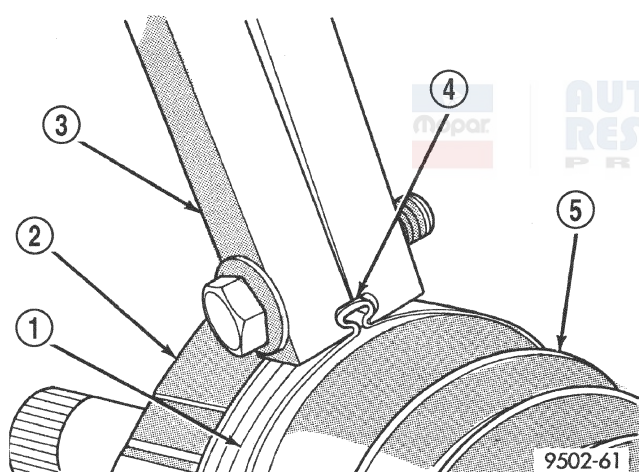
Crimping Tool Installed on Sealing Boot Clamp
